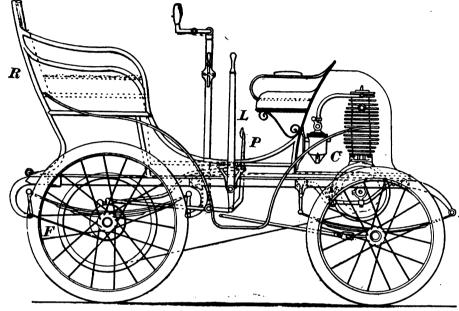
ELEVATION OF UNDERBERG MOTOR-VOITURETTE.
